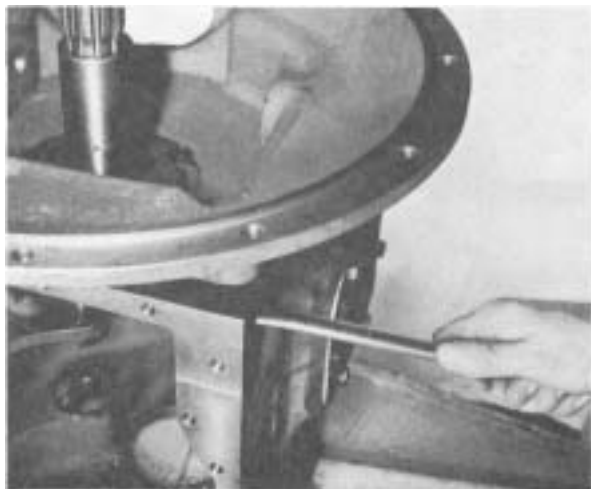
Install clutch housing and tighten stud nuts 60 to 80 ft. lbs. torque. Remove drive gear bearing cap and main drive gear.
